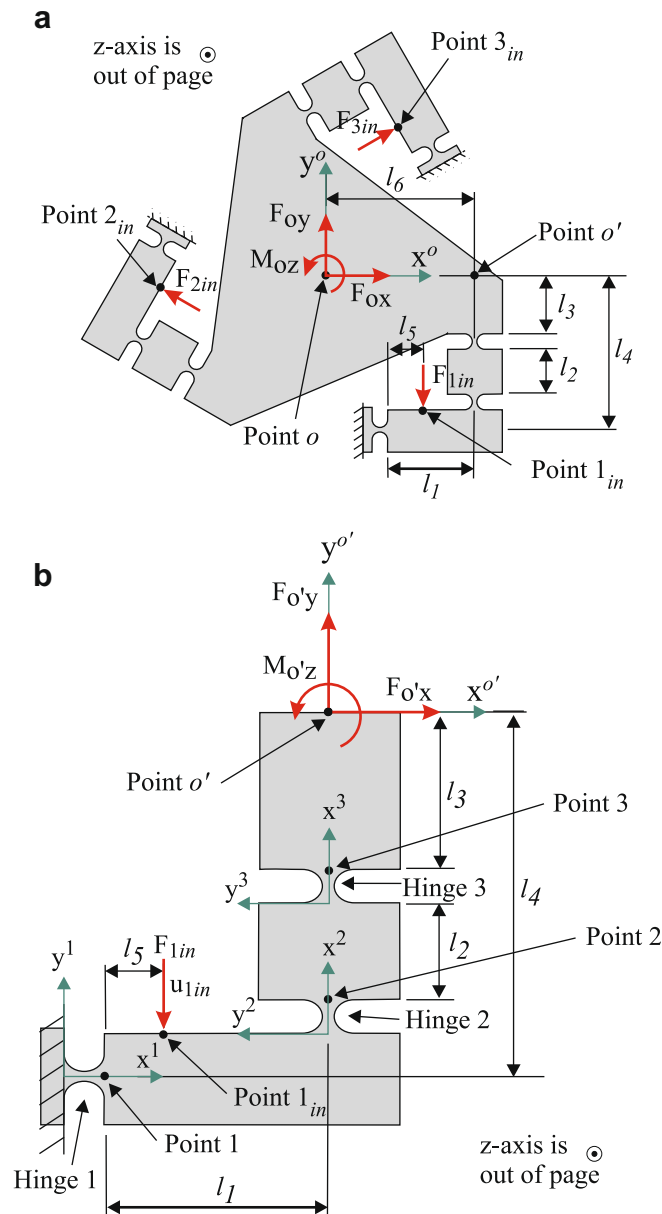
(a) 3-RRR compliant mechanism. (b) RRR compliant mechanism.
